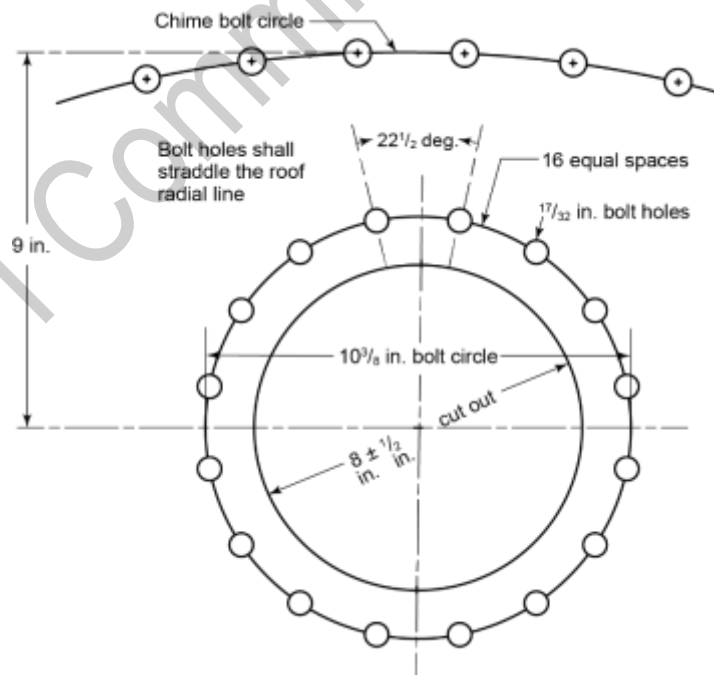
Bolt Pattern for 8-in. Circular Gauge Hatches and Vents
